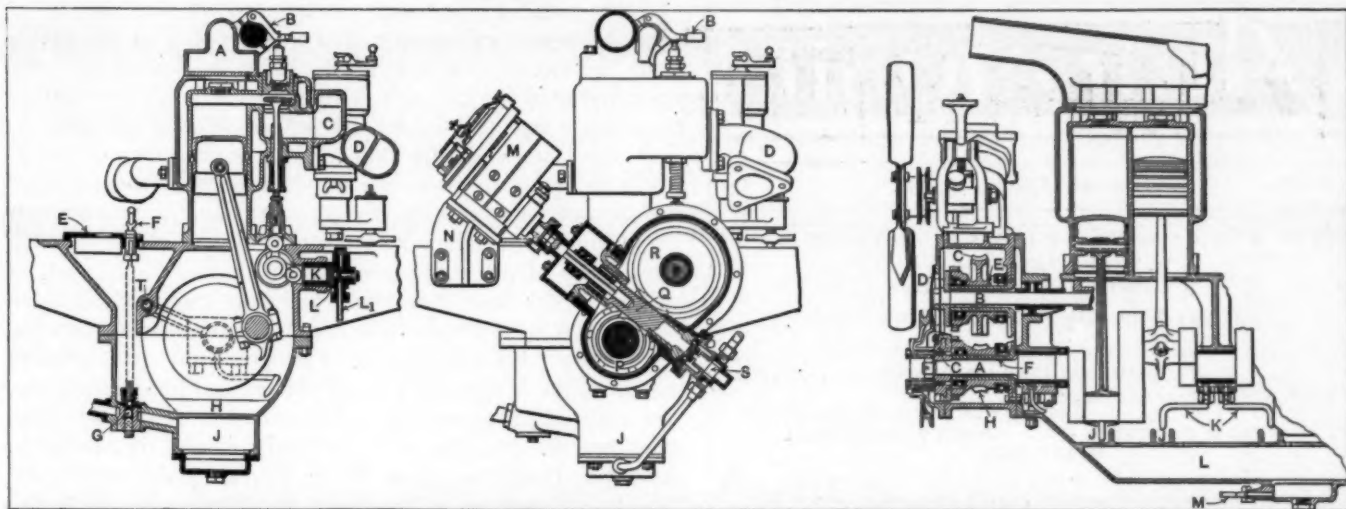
Oiling arrangements, plug cut-out switches and pressure pump
